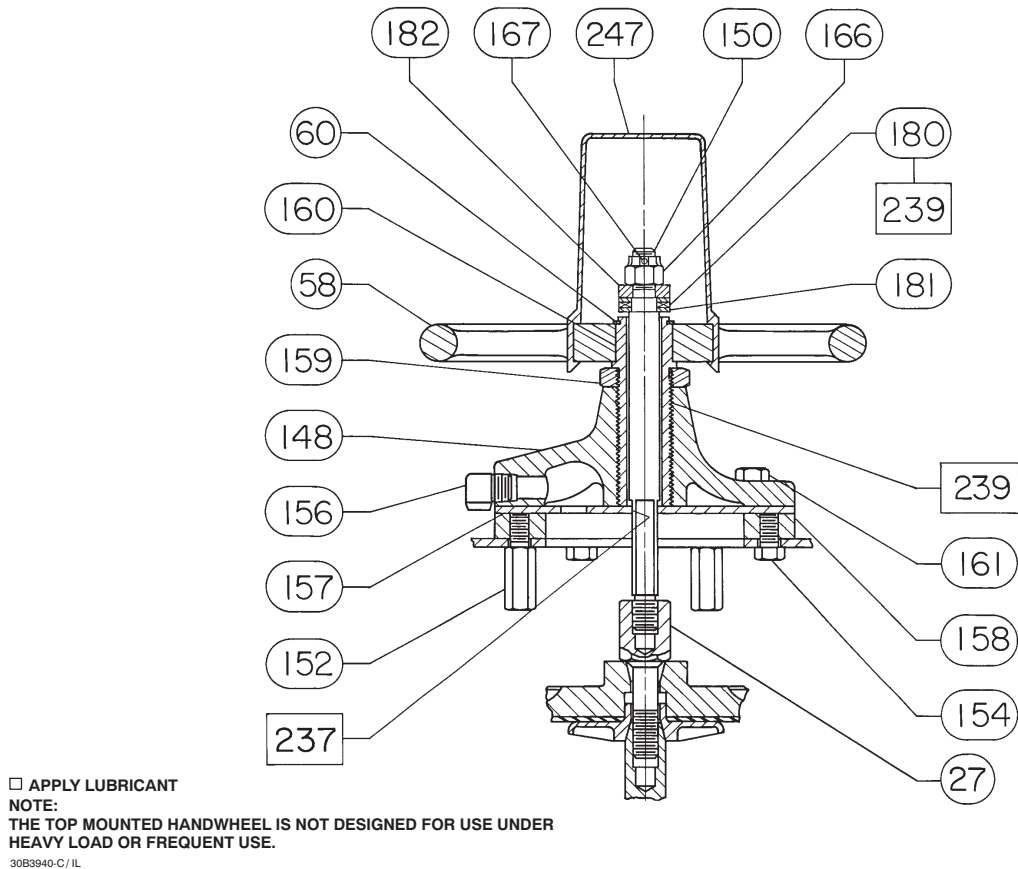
Top-Mounted Handwheel Assembly for Size 30 through 40 Actuators
